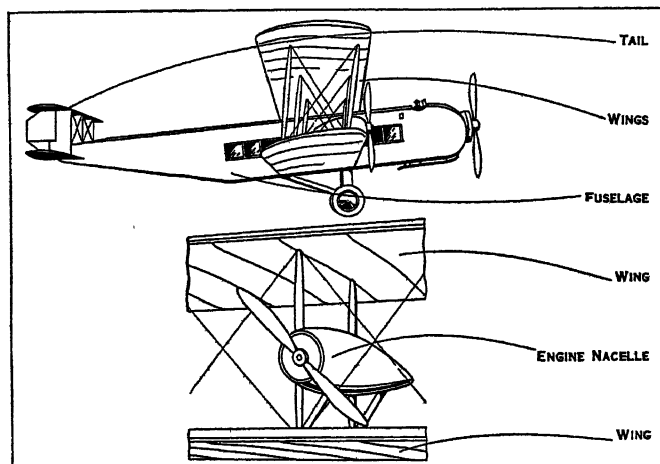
ABOVE, THE FUSELAGE OF A LARGE MULTI-SEATER MACHINE; BELOW, INTER-PLANE MOUNTING OF ENGINE IN NACELLE ON A BIG PLANE
